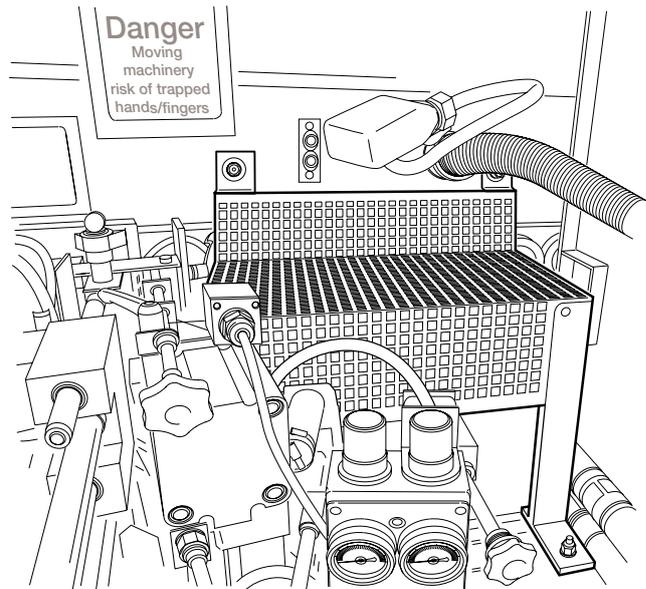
Additional fixed guarding fitted around dangerous parts of an older machine (drawing from photograph)
